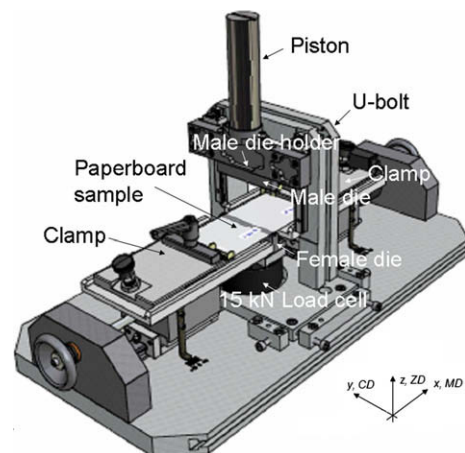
A 3D-CAD sketch of the laboratory creasing tool setup unit. The base plate dimensions was 750 × 390 mm and the height of the U-bolt from the base was 280 mm.
